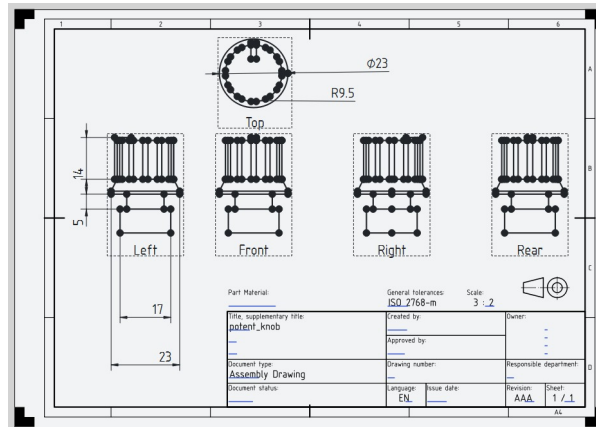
Drawing of Potent knob(Produced using FreeCADweb)
